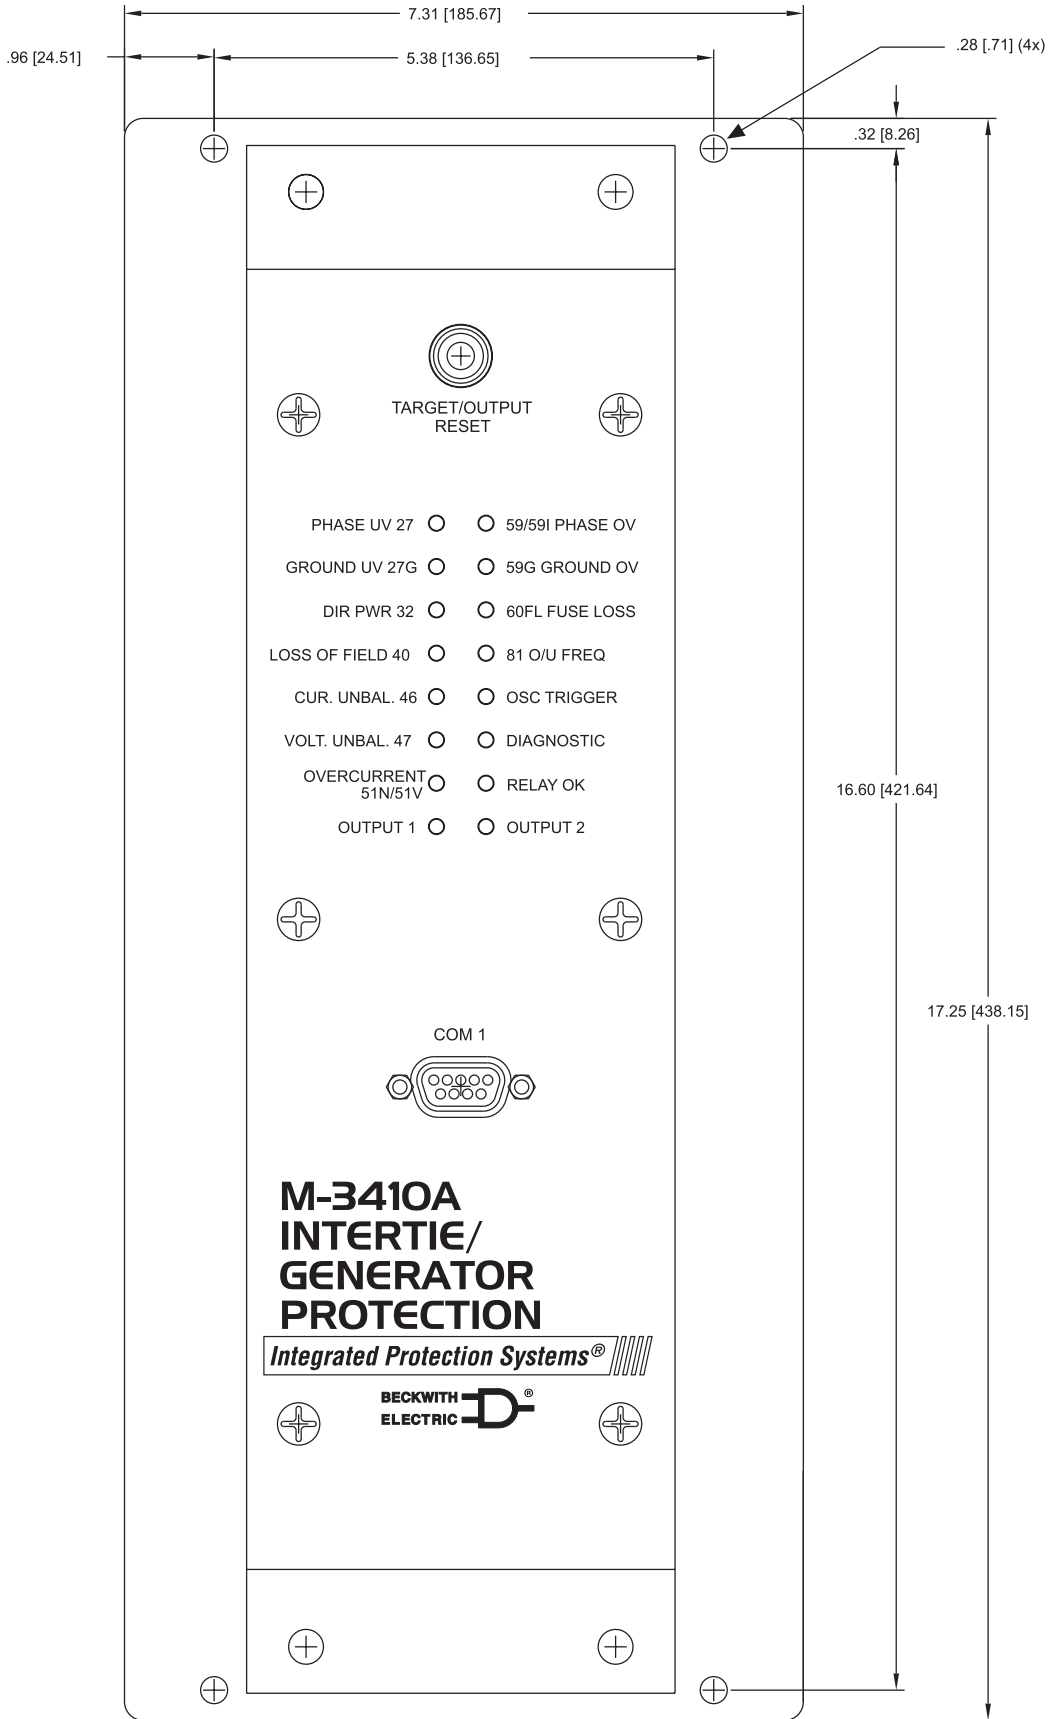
M-0290 and M-0296 Replacement Adapter Plate Dimensions
